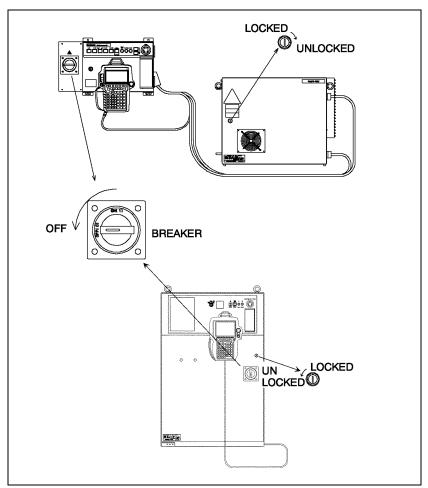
(a) Circuit breaker and latch of robot controller
